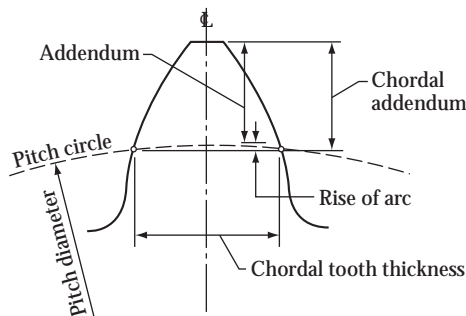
Chordal dimensions of a gear or a pinion tooth.
